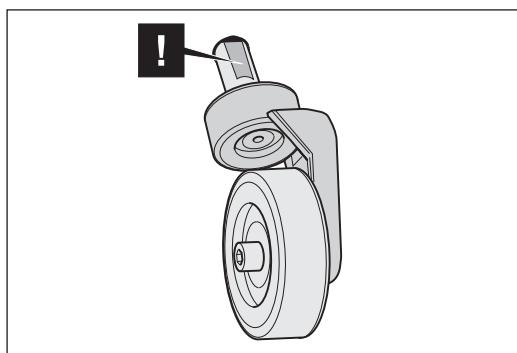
When mounting the complete rear wheel, align the tensioning surface of the tail axle towards the screw in the machine housing.
